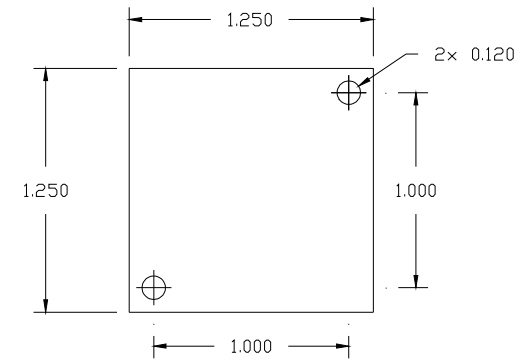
BSD-01C DIMENSIONS AND MOUNTING HOLES LOCATION
